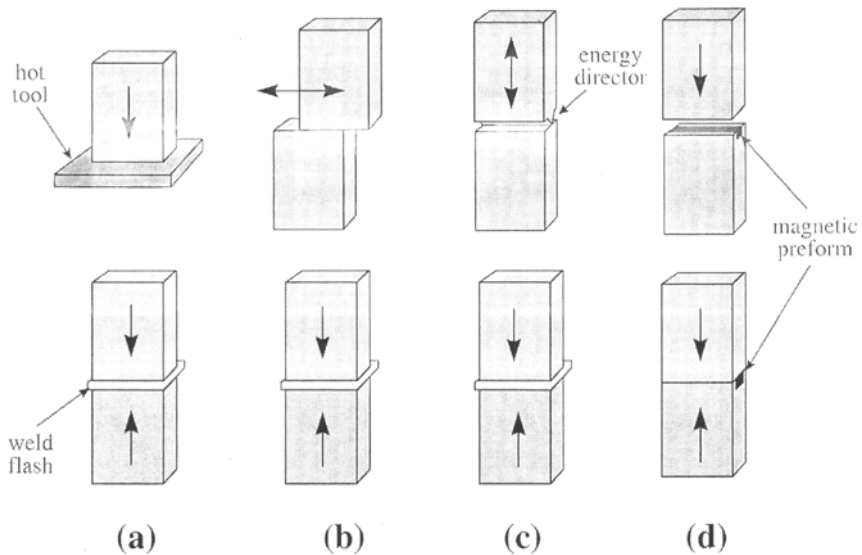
The most effective welding techniques for joining parts molded from polycarbonate resins include (a) hot-tool, (b) vibrational, (c) ultrasonic, and (d) induction bonding.
